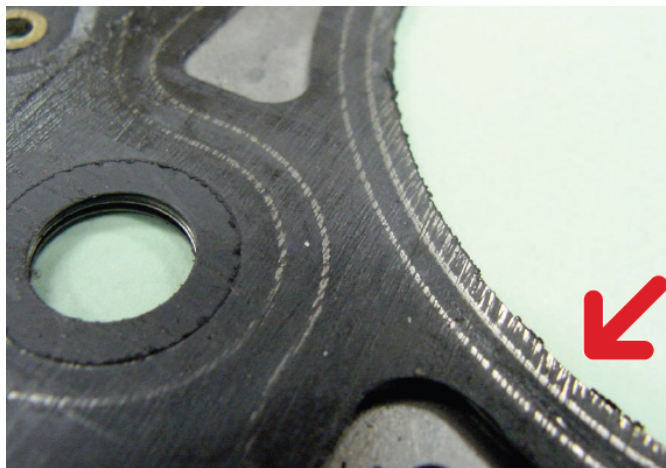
Rough surface finish shown – Peaks and Valleys too tall to seal.
